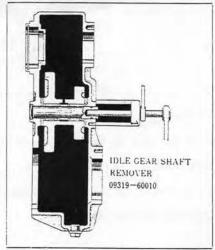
Removing the transfer idle gear shaft from the case with special tool.
